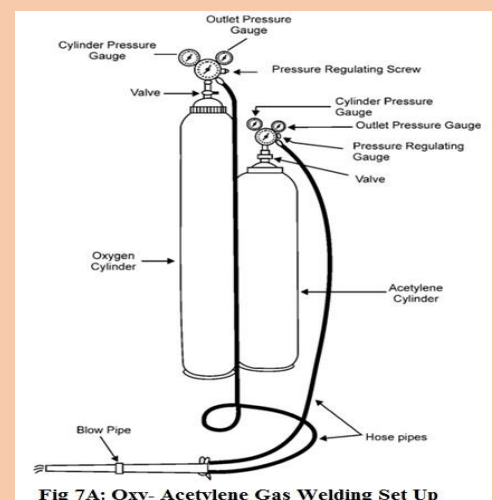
A: Oxy- Acetylene Gas Welding Set Up
